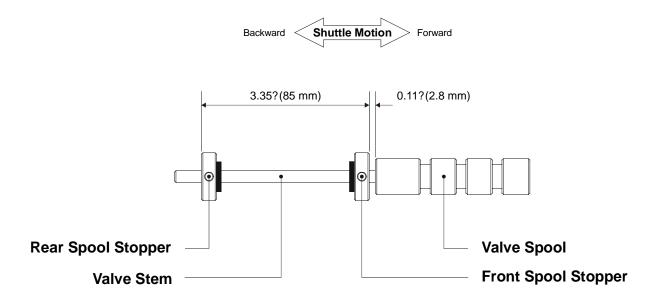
Spool valve assembly illustrating the initial settings for the front and rear spool stoppers. Arrow indicates shuttle feed plate movement.
